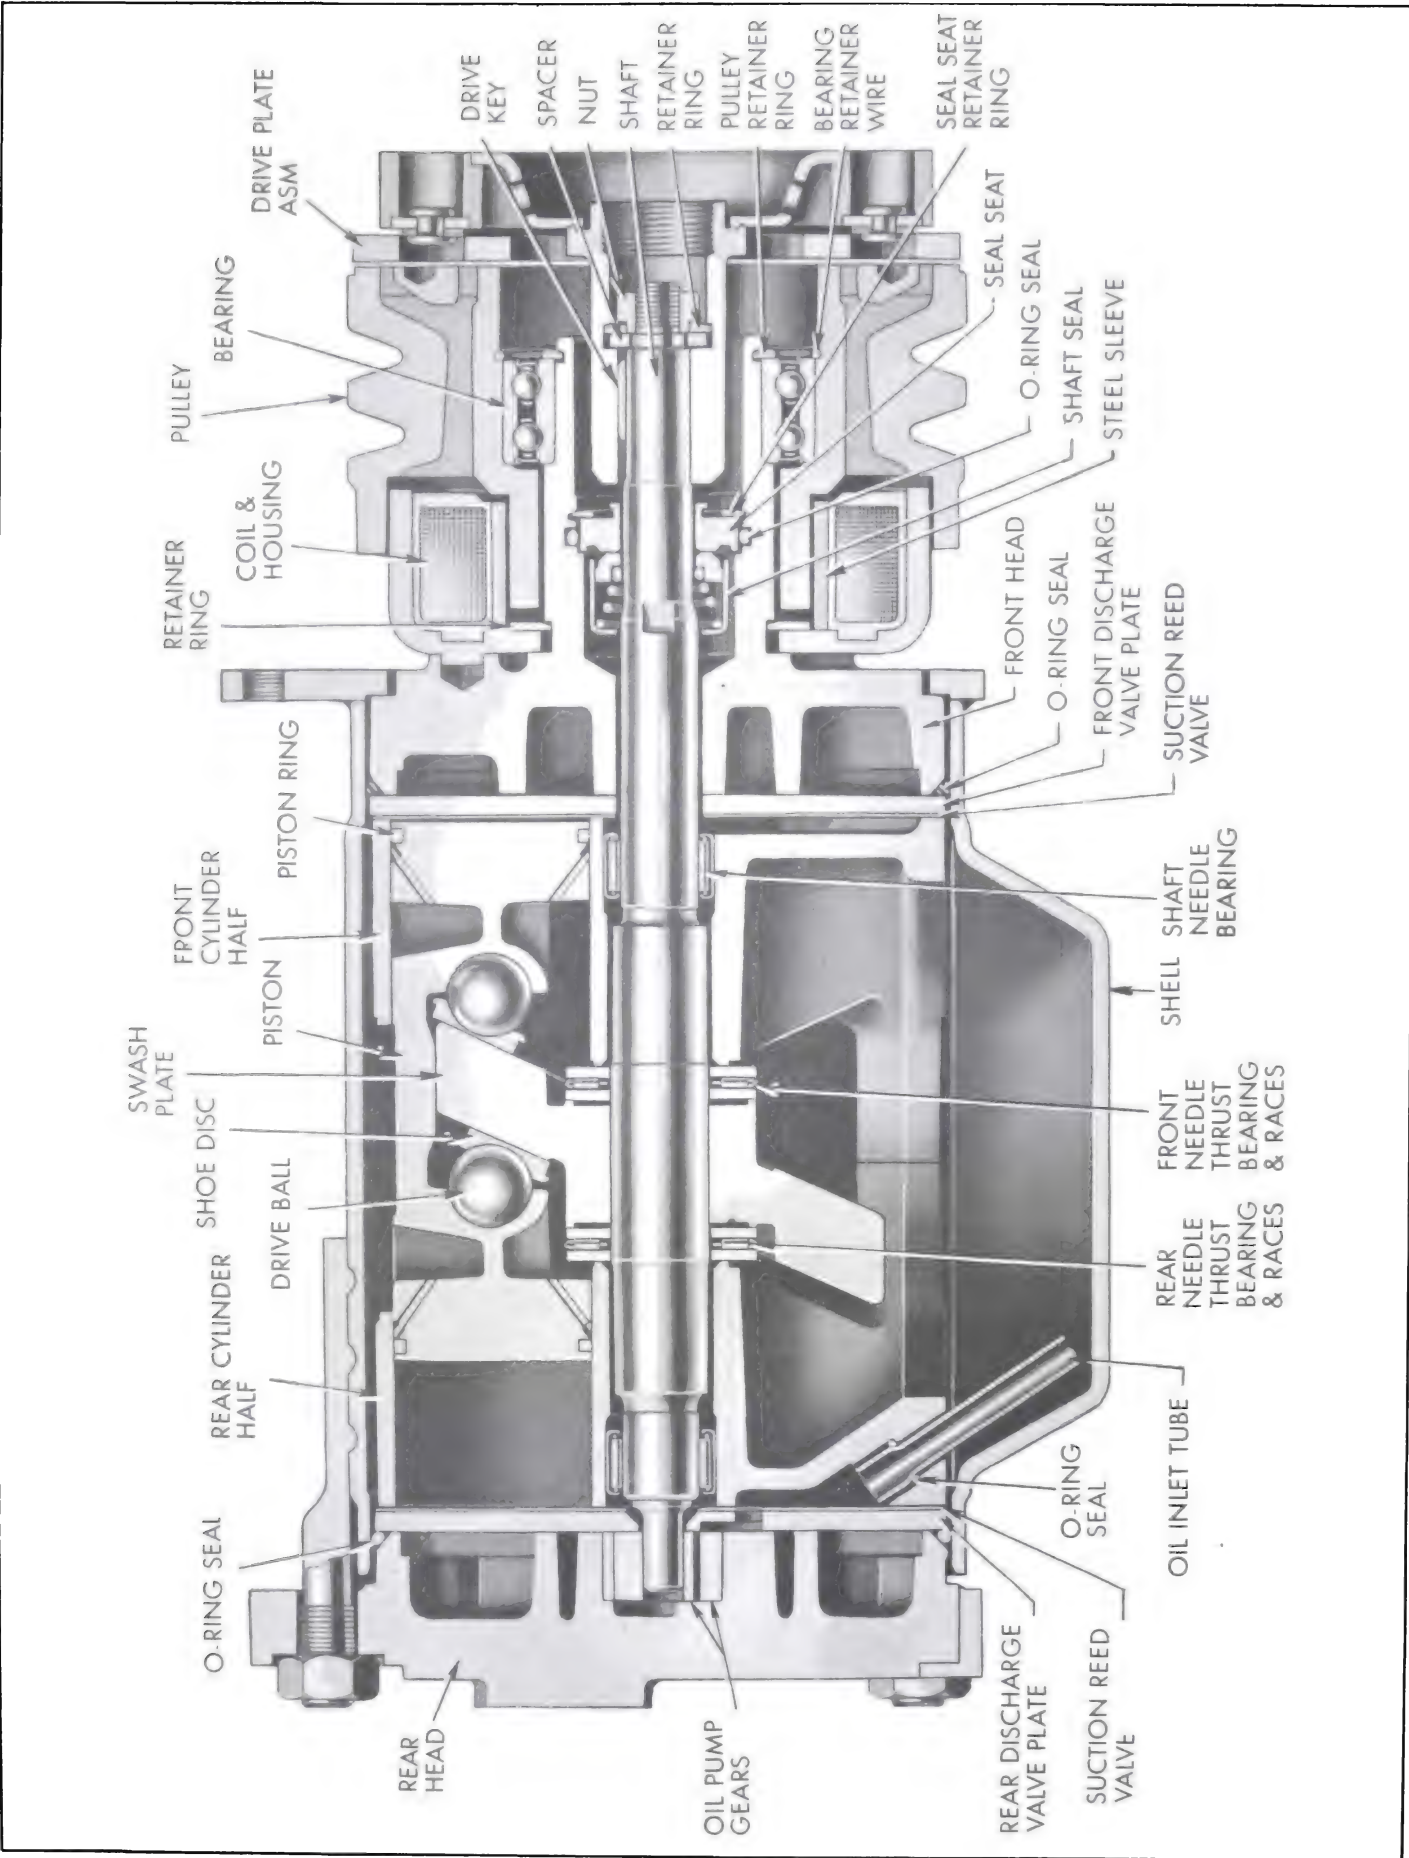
Sectional View of Compressor - 4600, 4700 and 4800 Series
